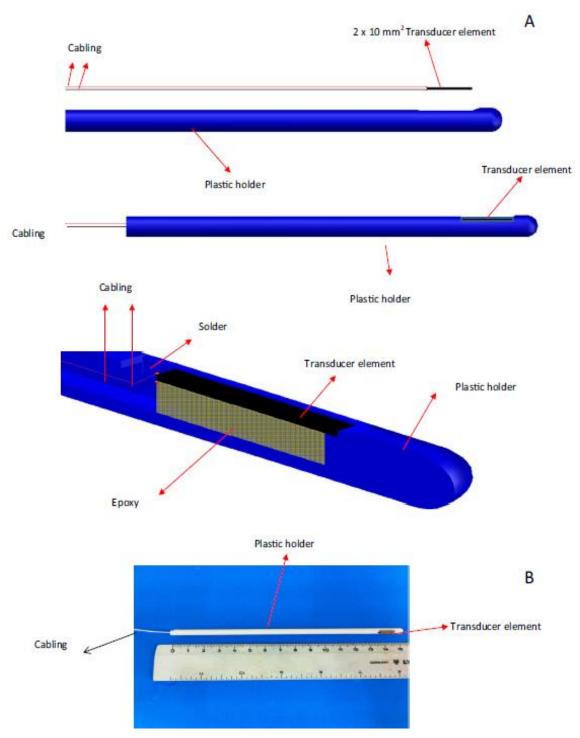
A) CAD drawing of transducer. B) Photo of the 2x10 mm² prototype transducer.
